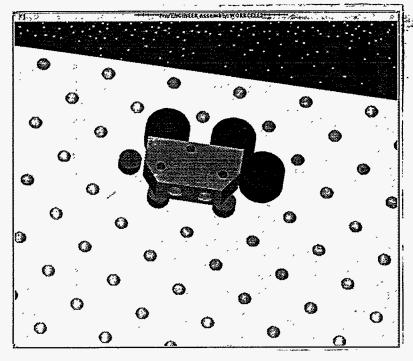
Test Part Assembly: Valve Body in Modular Fixturing System
